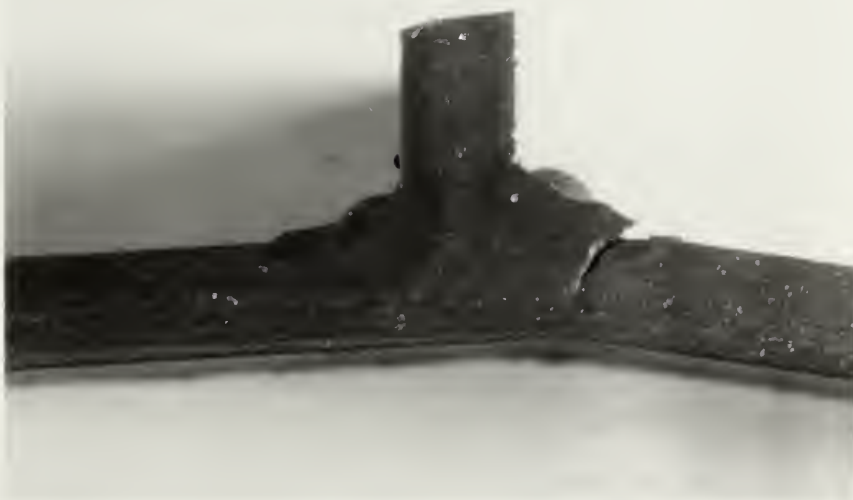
Multipass underwater weld showing small degree of undercut further away from plate intersection.
